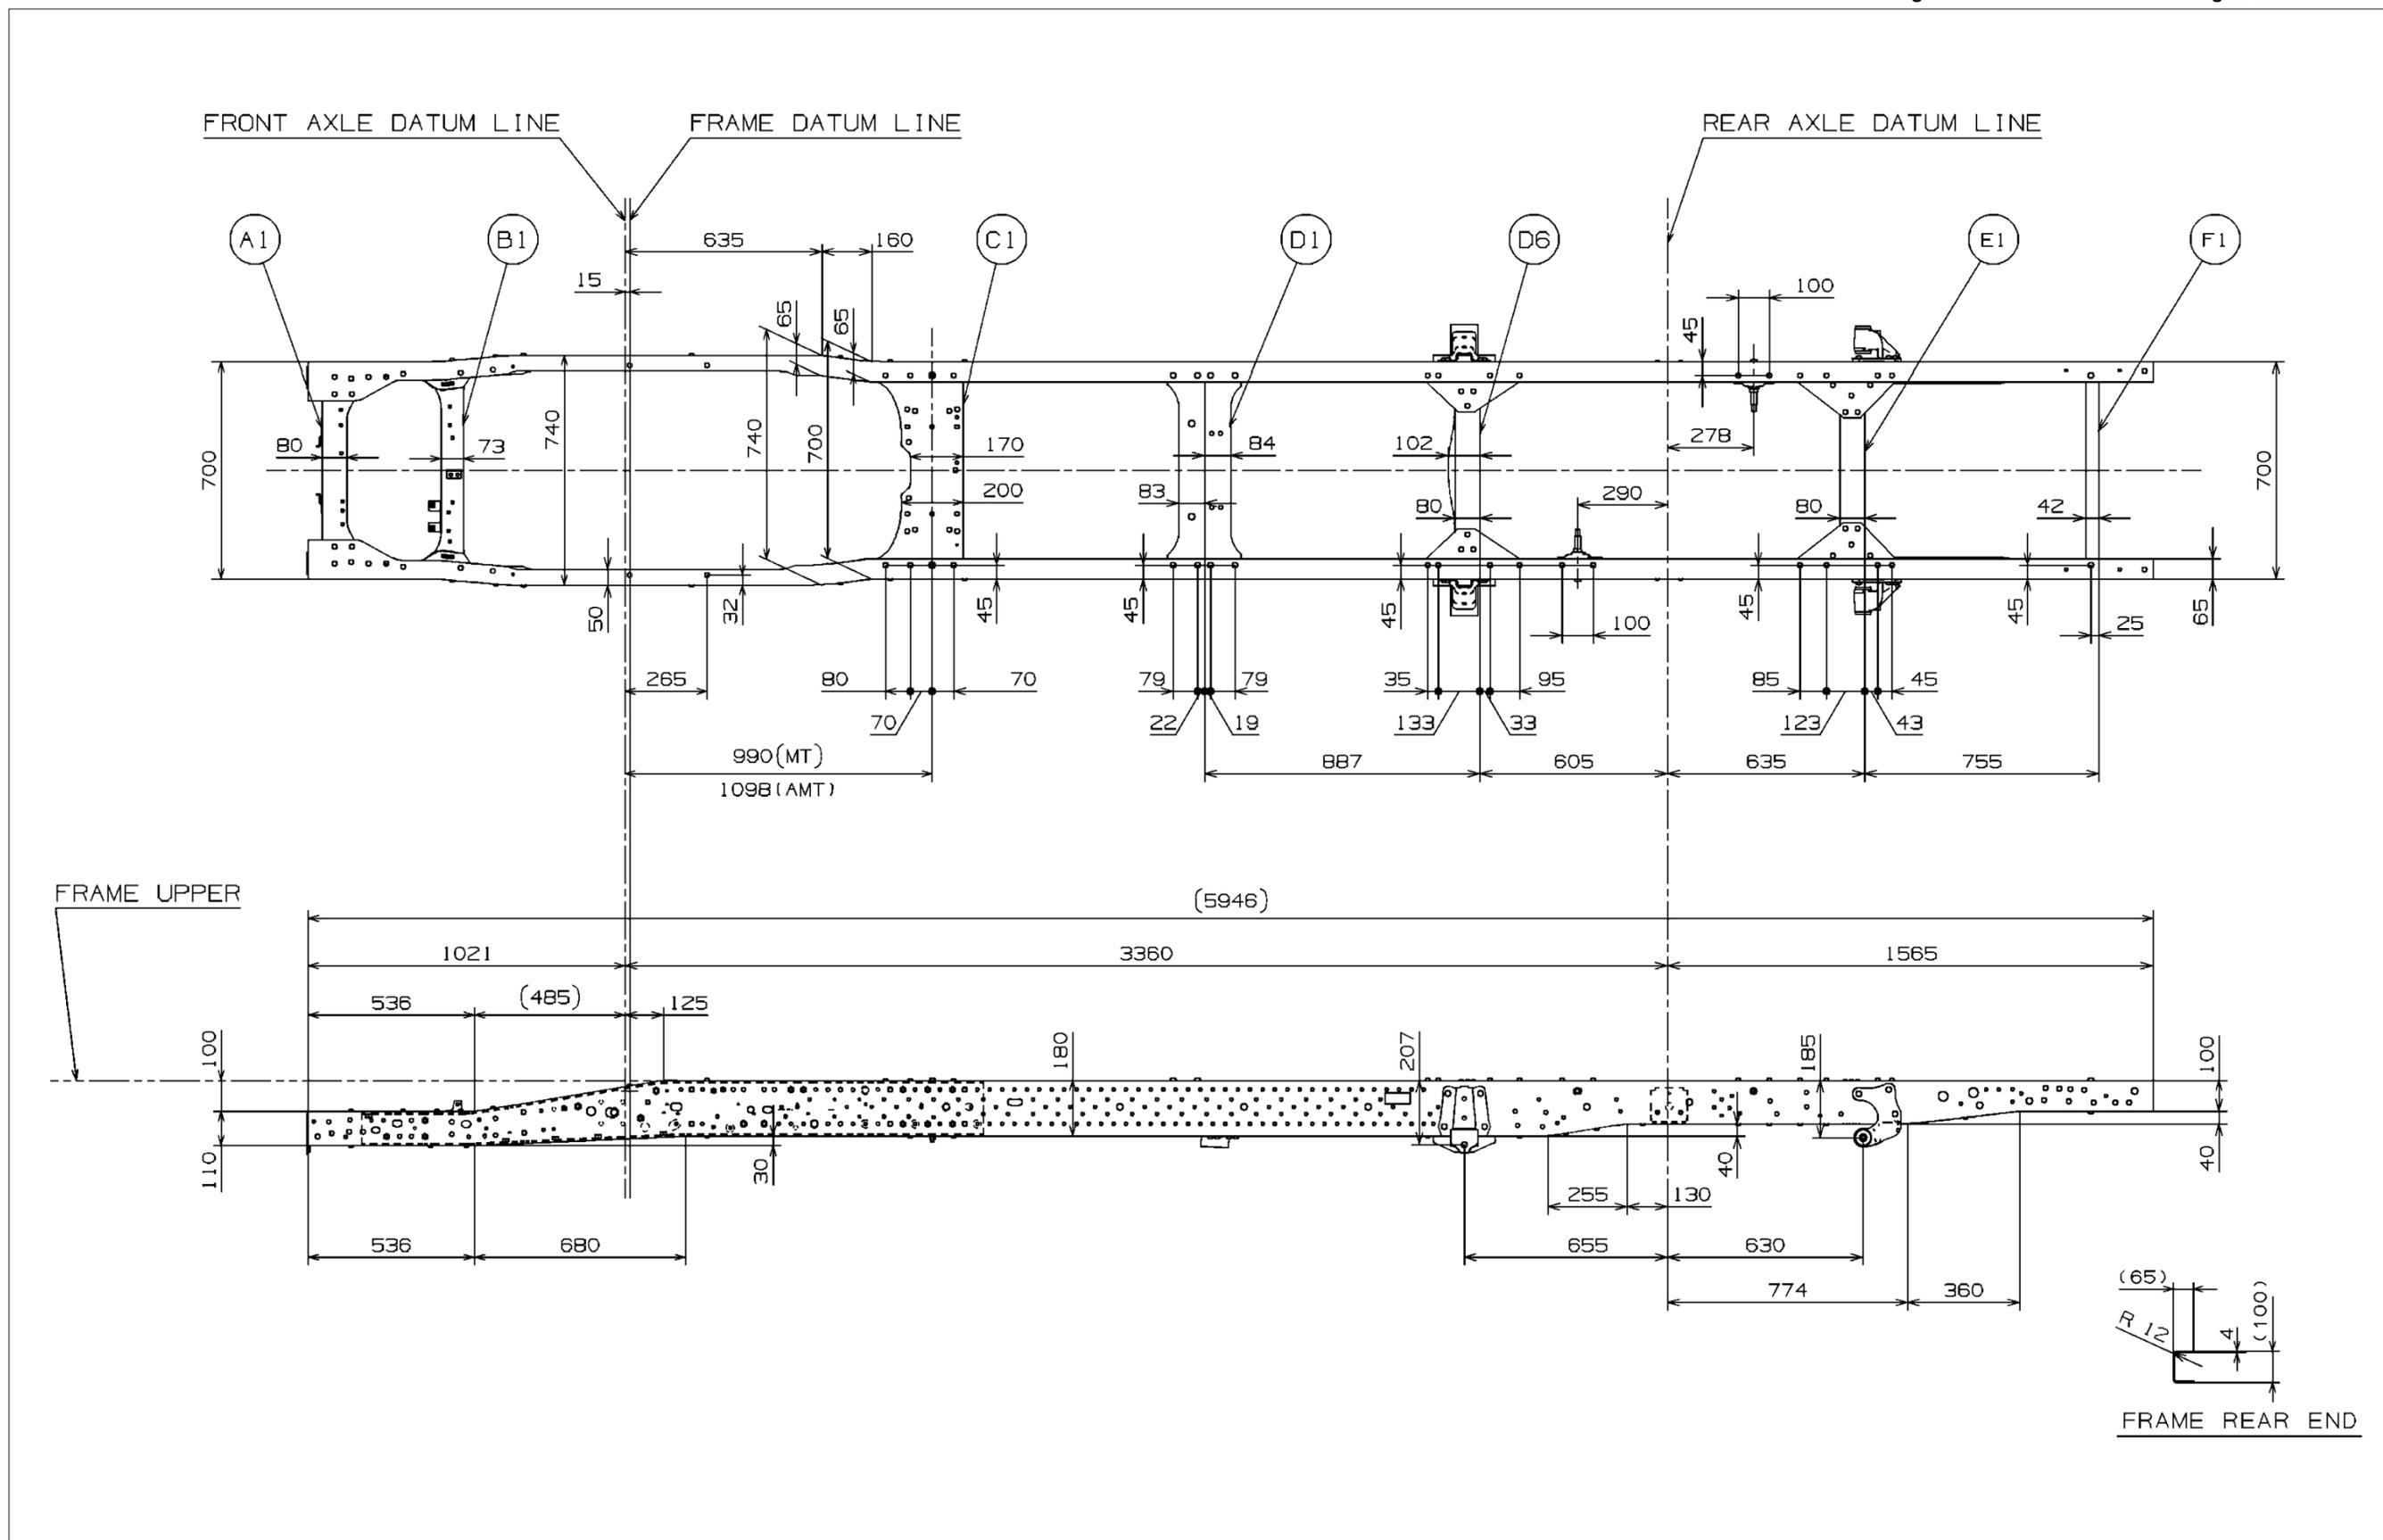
Chassis Frame Drawing NMR85L/U-HH5AYE
